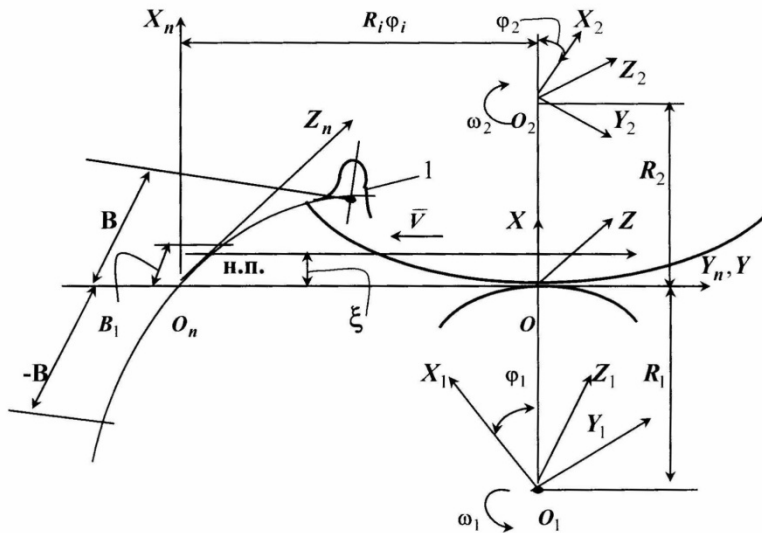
Scheme of instrumental rod toothings with pinion and gear (1 – the profile of rod arc tooth in normal cross-section)
